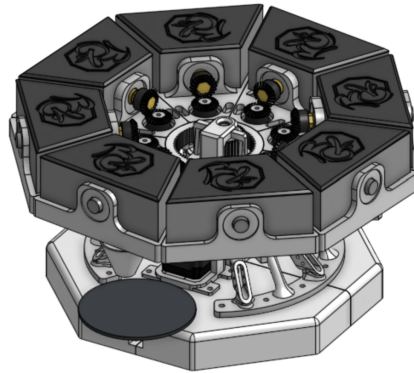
Assembled carousel lowered onto the upper trunk's ring track.
